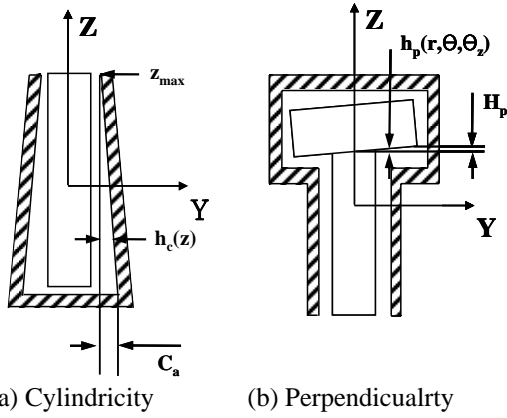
Film thickness of journal and thrust bearings due to the cylindricity and the perpendicularity
